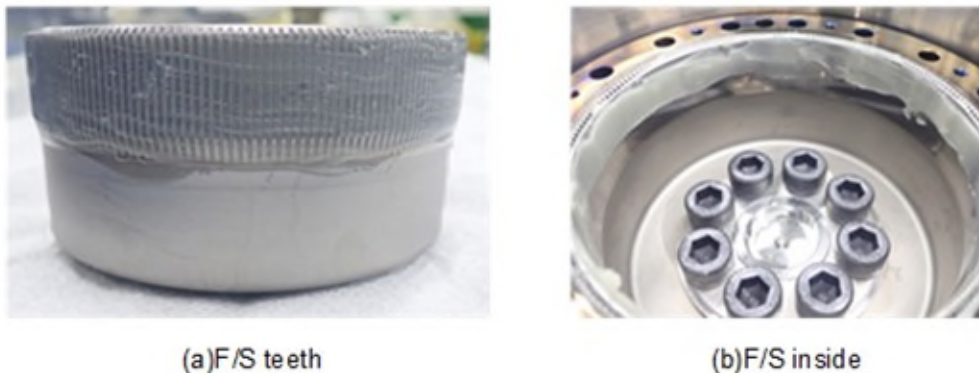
Specimen Lubricated with Grease (Before Assembly)
